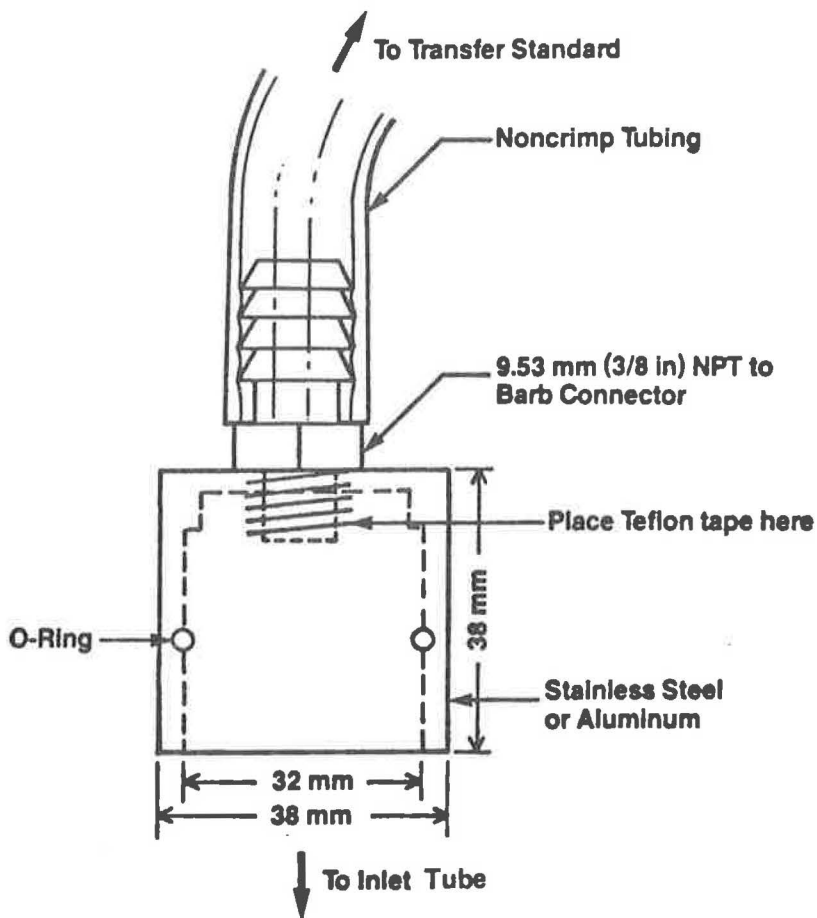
Inlet adapter that may be used to connect the transfer standard to the sampler's inlet tube.
